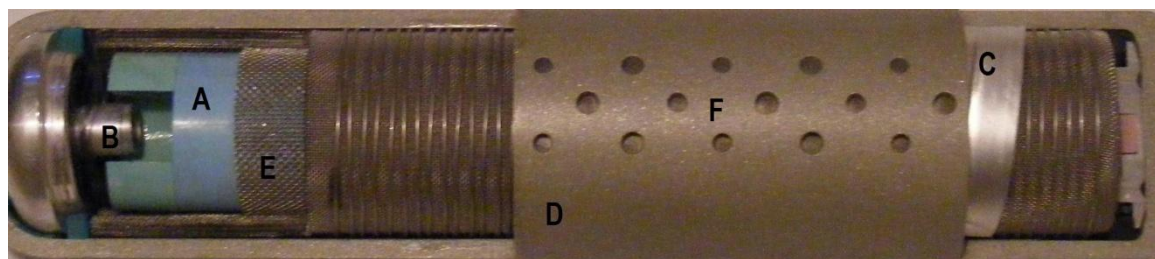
Cutaway view of a passenger-side pyrotechnic inflator.
